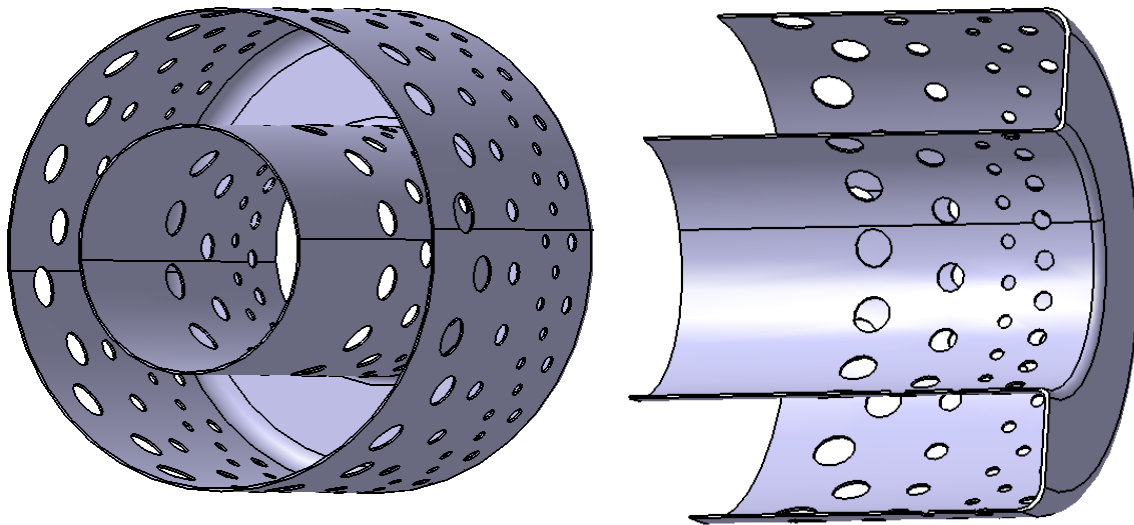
The Combustion Chamber accompanied with a cut-out design.
